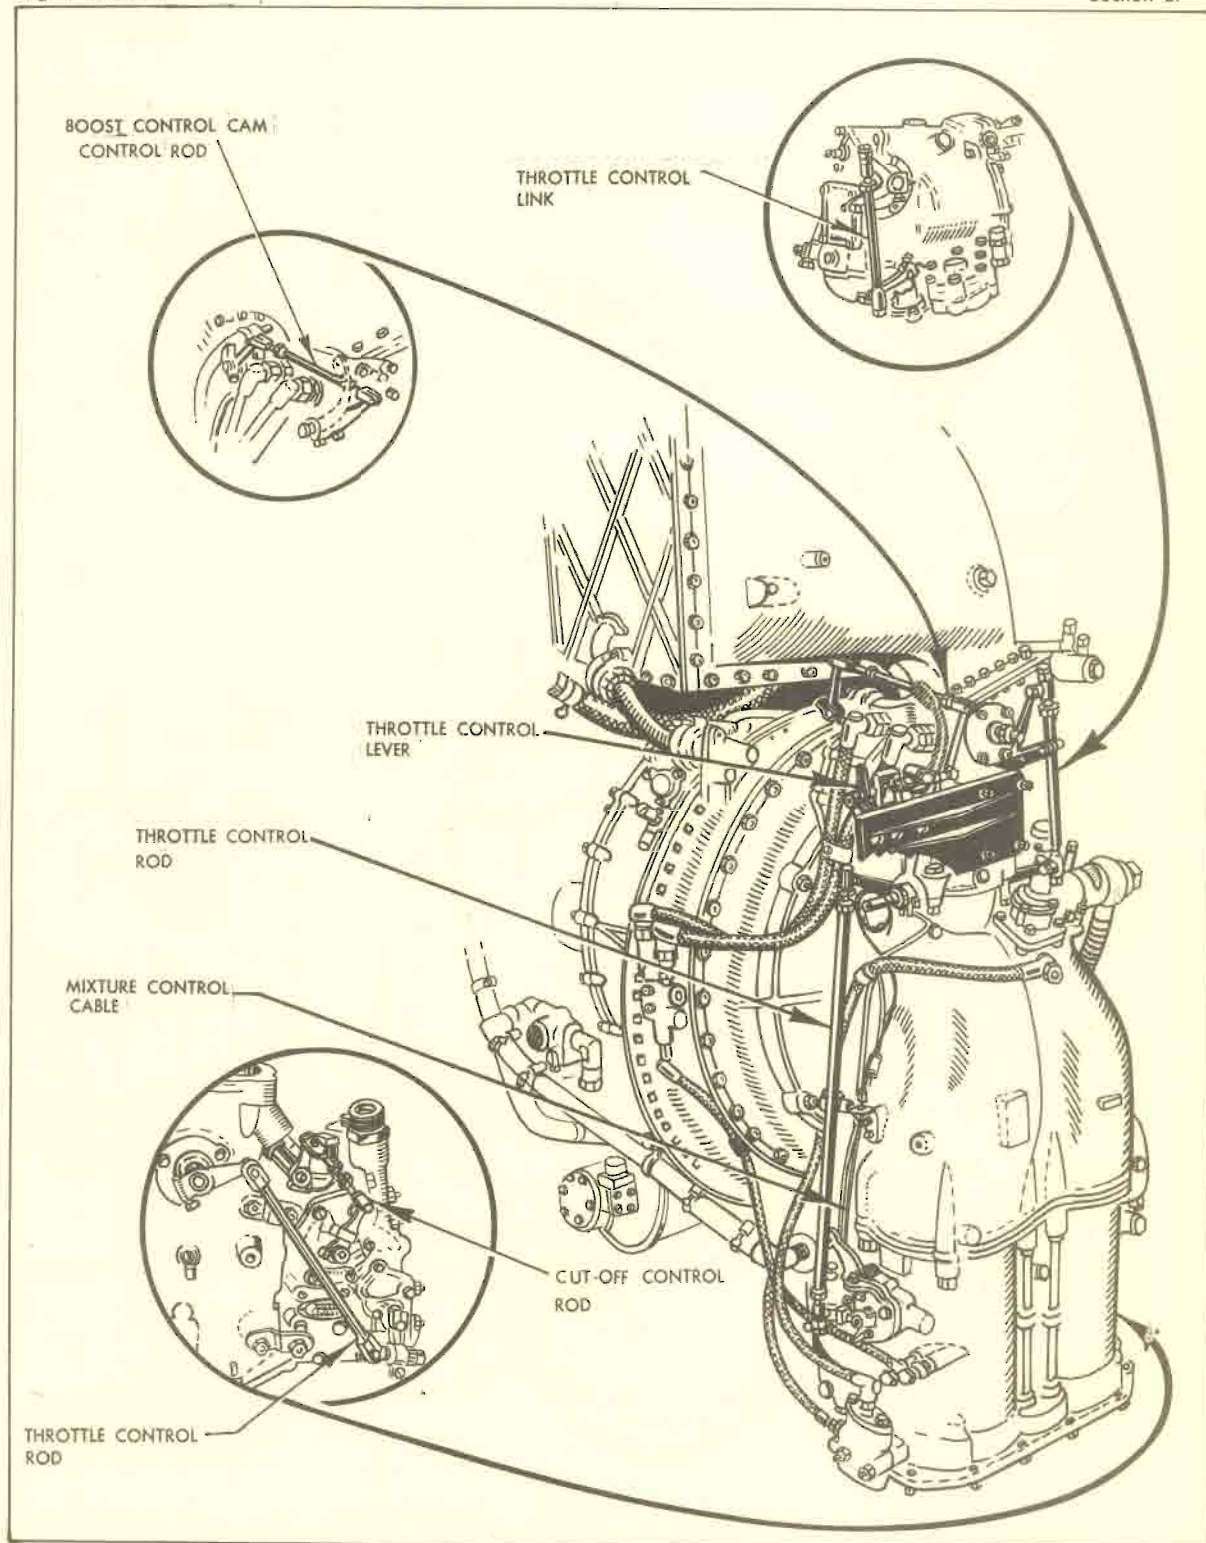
A—ENGINE CONTROL SHAFT LINKAGE
